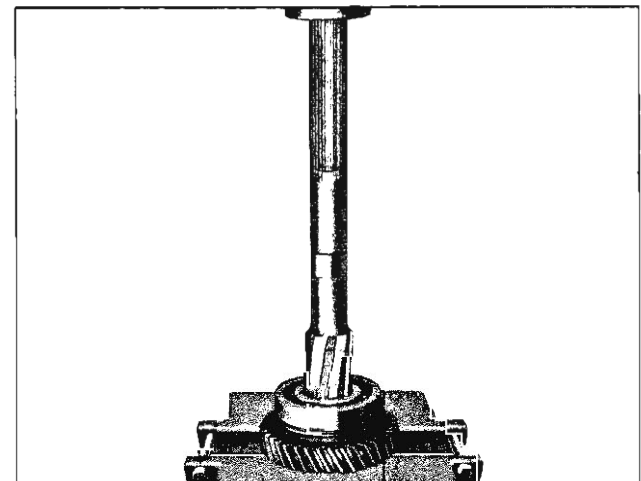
M—Removing Mainshaft from Rear Bearing and First Speed Gear
